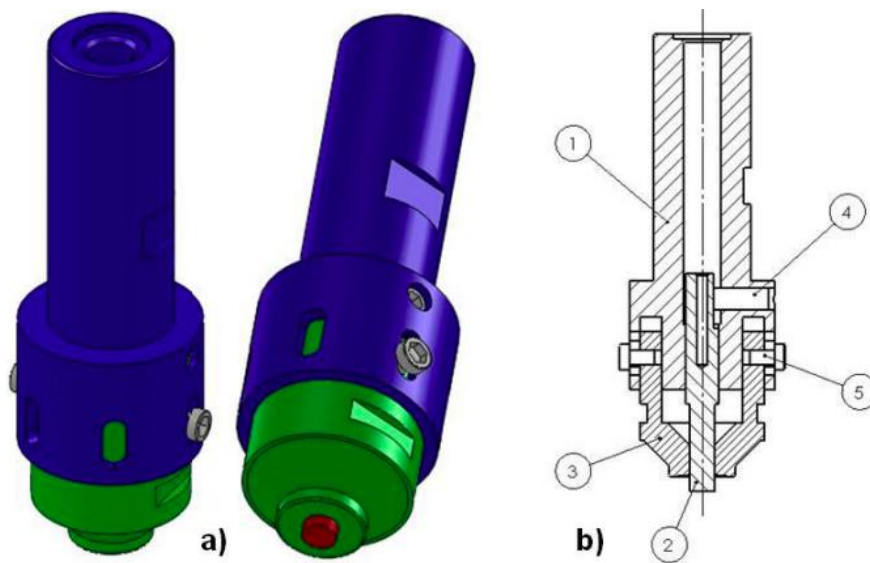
iSTIRtool_v3. A) 3D model view; b) cut view: (1) Tool body; (2) Pin; (3) Shoulder; (4) Pin Fixation Screw; (5) Shoulder Fixation Screw [62].
